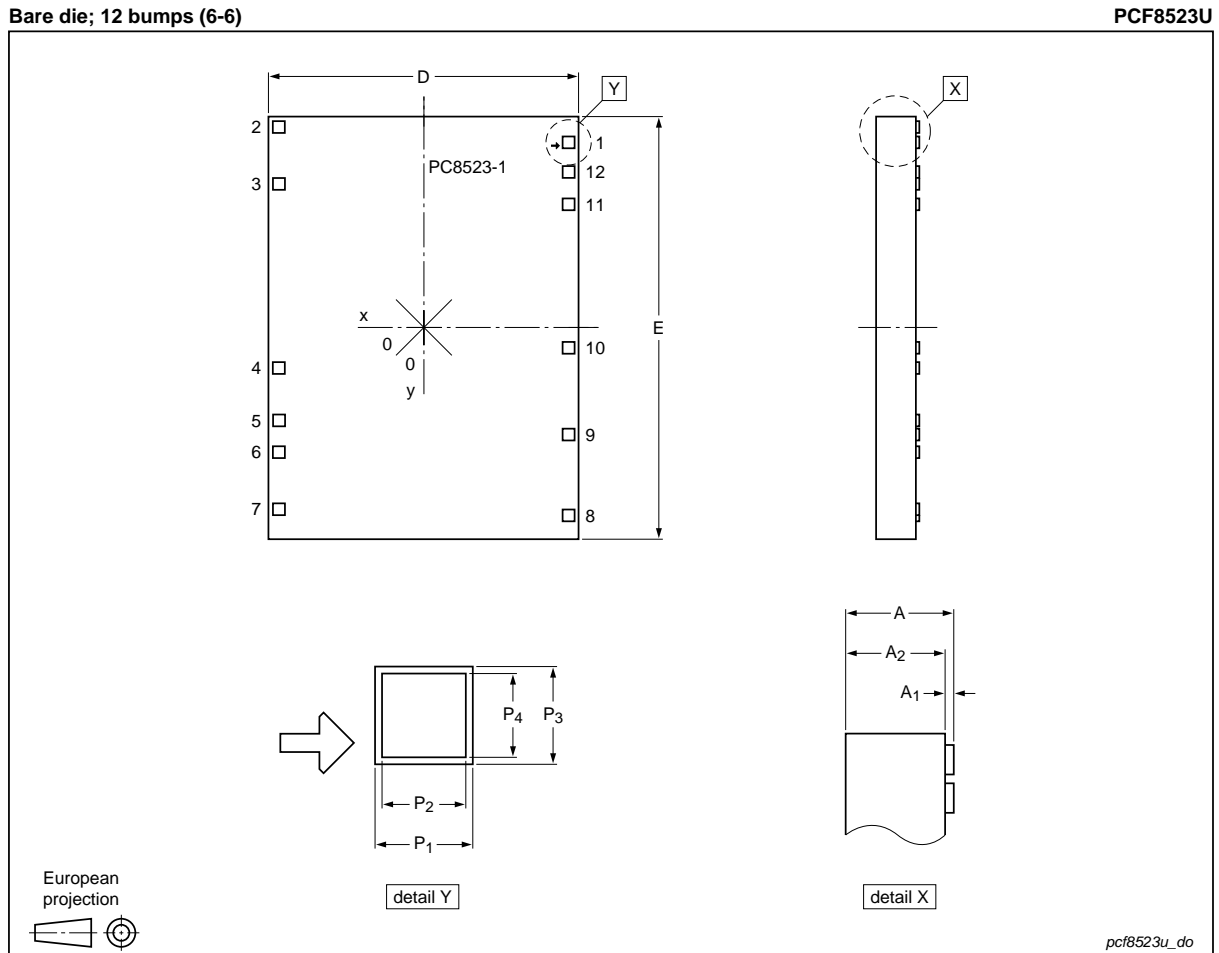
Bare die outline of PCF8523U (for dimensions see Table 48)
